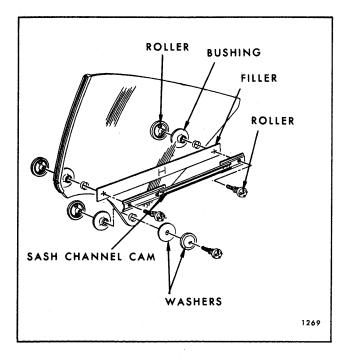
Rear Quarter Window Assembly - "Z-37" Styles
